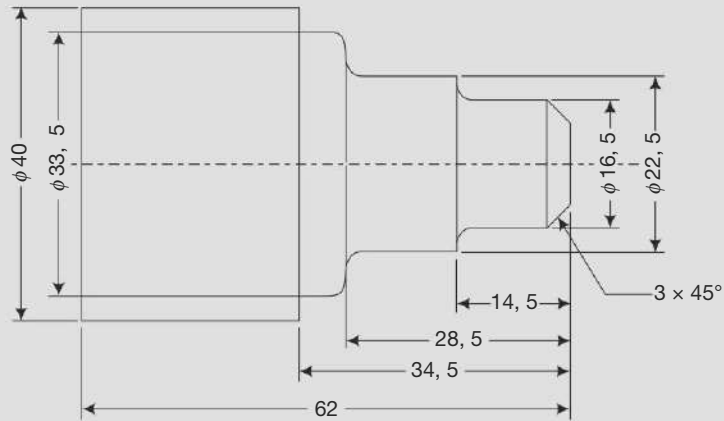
Part drawing to be used as an example for cut planning for a turned component
